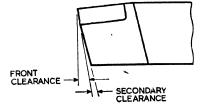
PRECISE TOOL ANGLES REQUIRE MACHINE GRINDING (A. C. Wickman, Ltd.)
